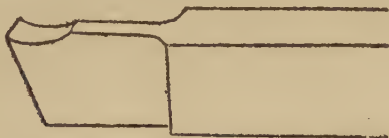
PARTING TOOL FOR STEEL OR IRON
